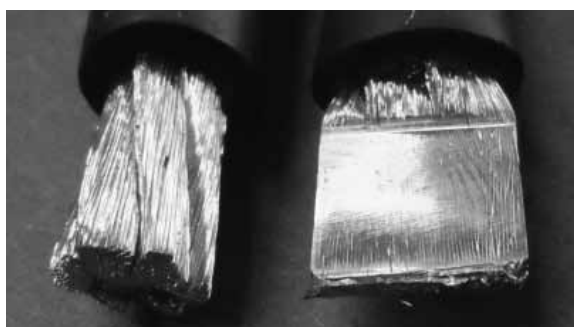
25 mm² strand (left) compacted by resistance welding (right)
